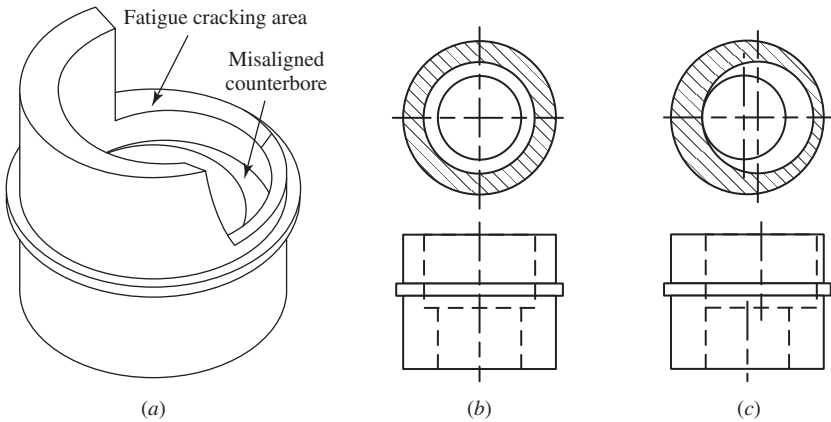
Failure of an oil tube. (a) Failed part. (b) Concentric counterbore. (c) Misaligned counterbore.
